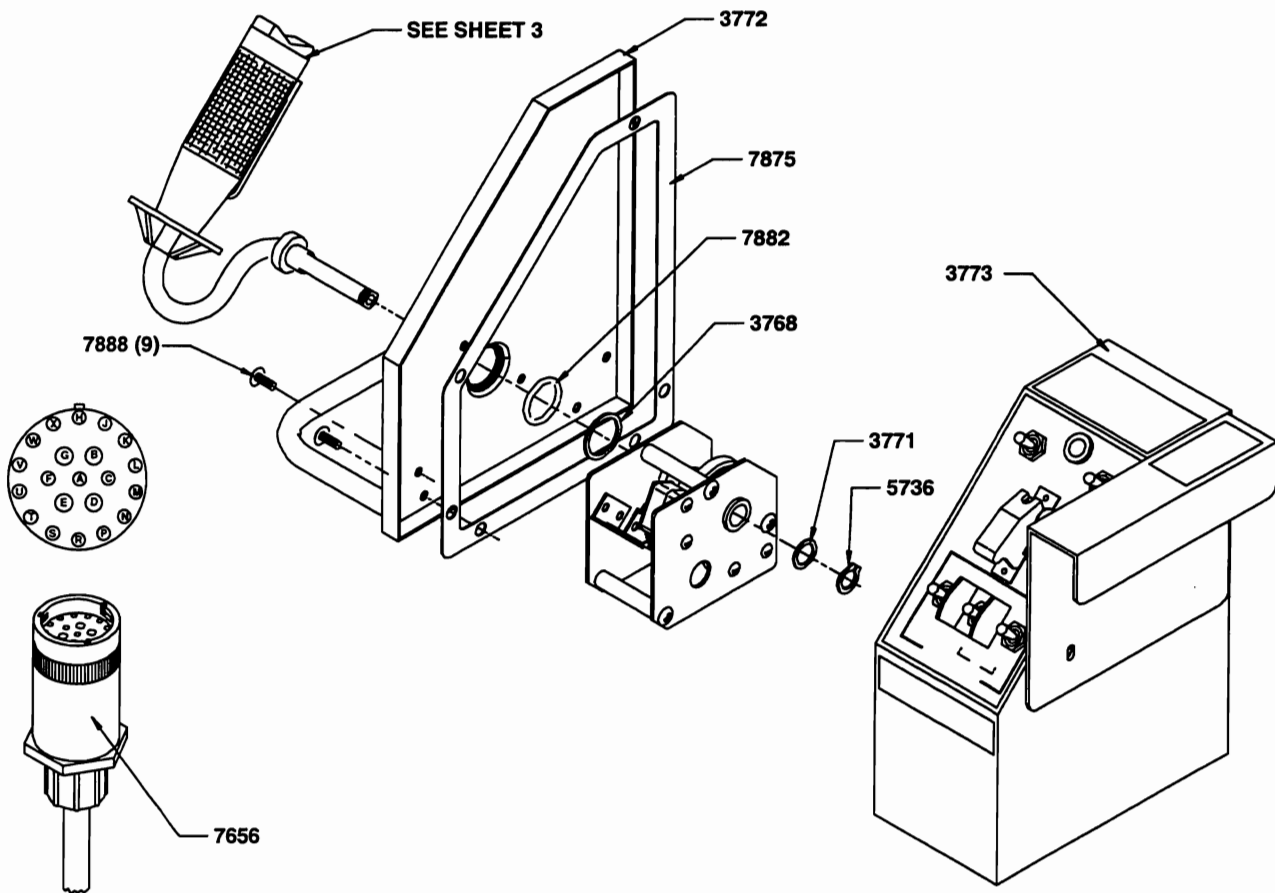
Standard Upper Control Box Assembly - Electric Units
